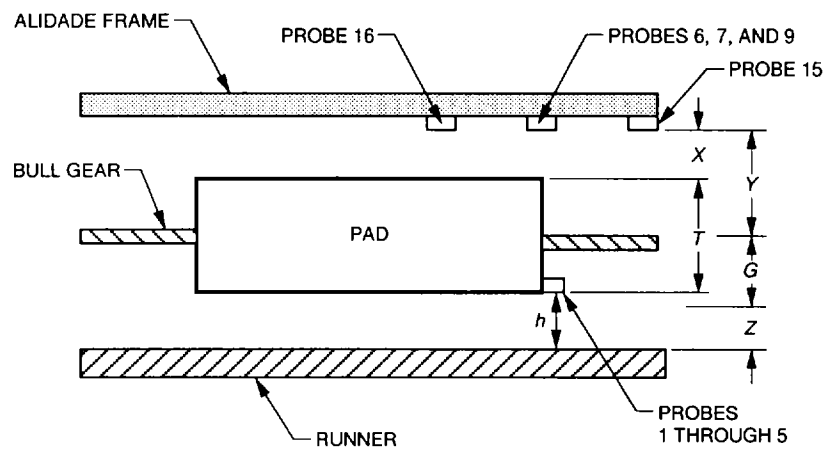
Hydrostatic bearing pad, runner, bull gear, and alidade frame viewed radially while facing toward the antenna center.
